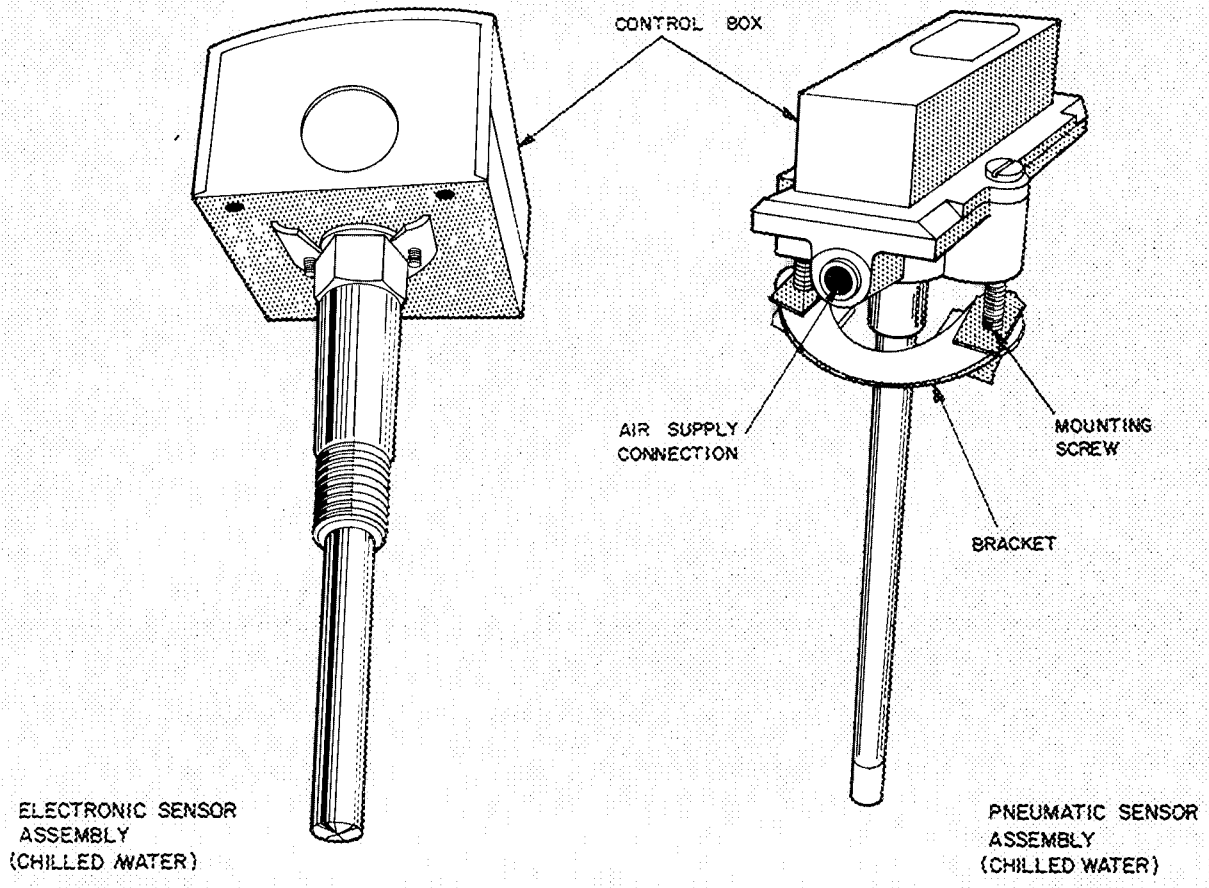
Electronic and Pneumatic Chilled Water Sensor Assemblies
